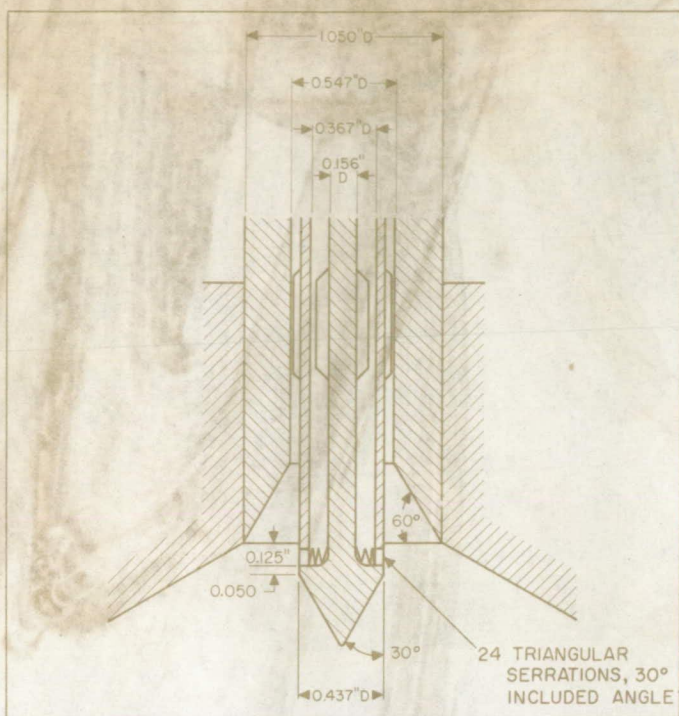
Modification No. 2 of Tube Configuration of 800-lb-Thrust Concentric-Tube Injector
